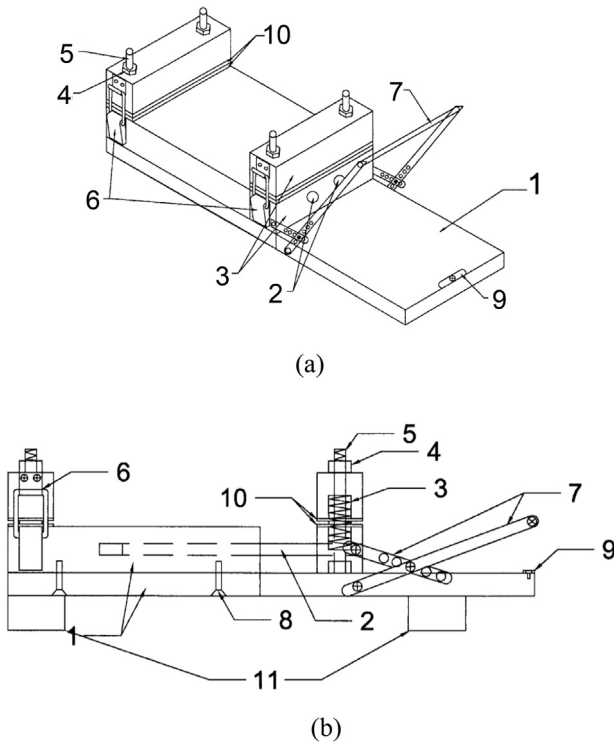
The crank-slider mechanism of the stretching platform. (a) isometric view, (b) side view. Here, 1 – platform base; 2 – sliding guides; 3 – spring return; 4 – nut; 5 – a bolt; 6 – latch for fixing the film clip; 7 – lever; 8 – connecting bolts; 9 – lever position lock; 10 – rubber cloth; 11 – platform supports.
